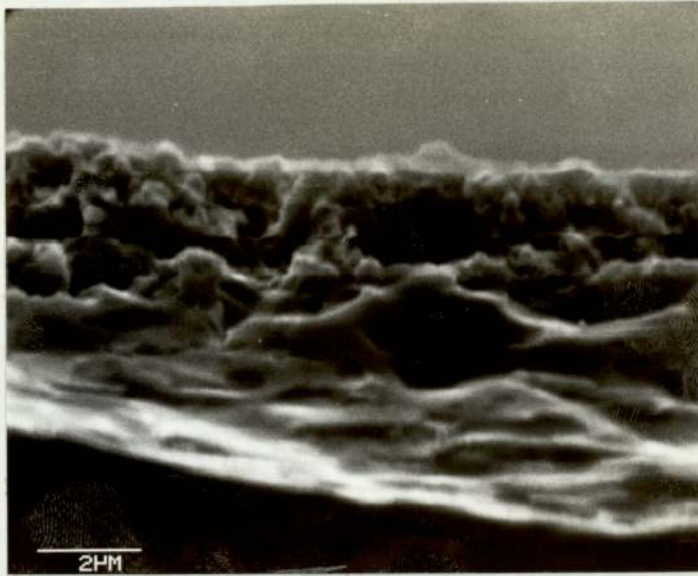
Fatigue fracture in the compound layer at the notch root, showing microporosity, nitrocarburised 080M15, root radius
